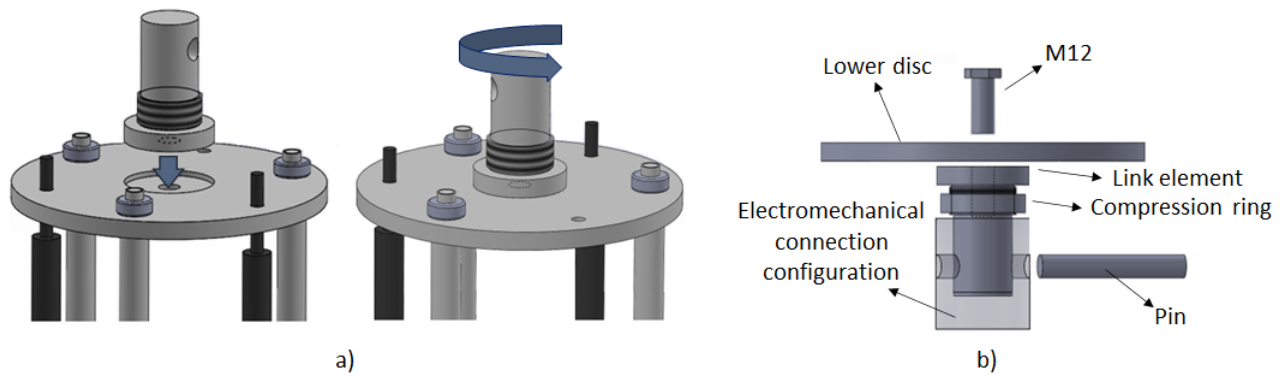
Detail on the connection upper/lower discs-link elements. a) Rotation mechanism. b) Exploded view of the complete connection configuration.
